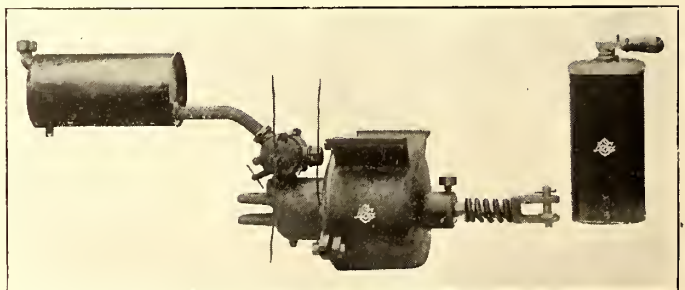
ASSEMBLY OF BRAKING SYSTEM; ALSO SHOWING PLATFORM CONTROLLER
